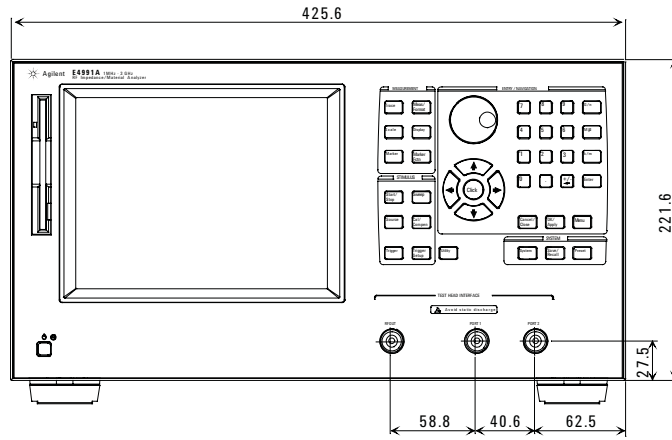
Main unit dimensions (front view, in millimeters, nominal)
